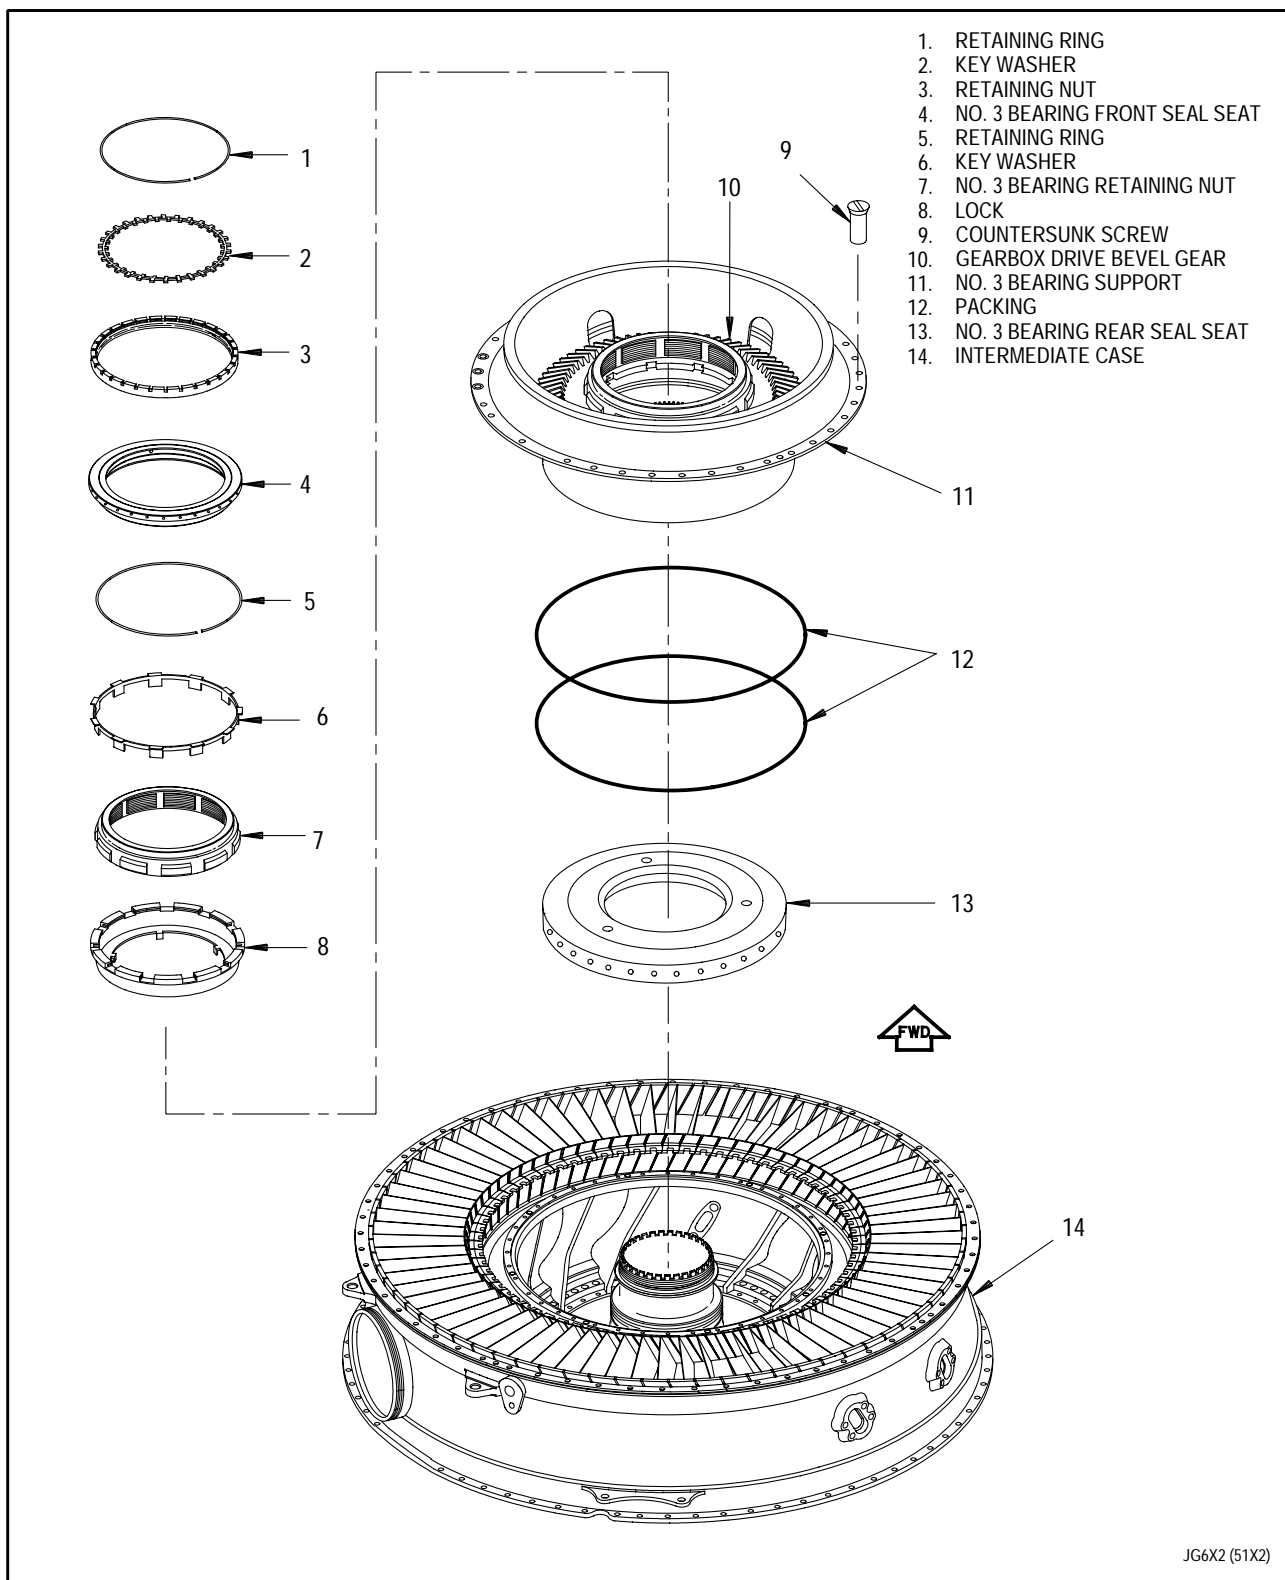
No. 3 Bearing Front Seal Seat, No. 3 Bearing Package, and No. 3 Bearing Rear Seal Seat - Removal
